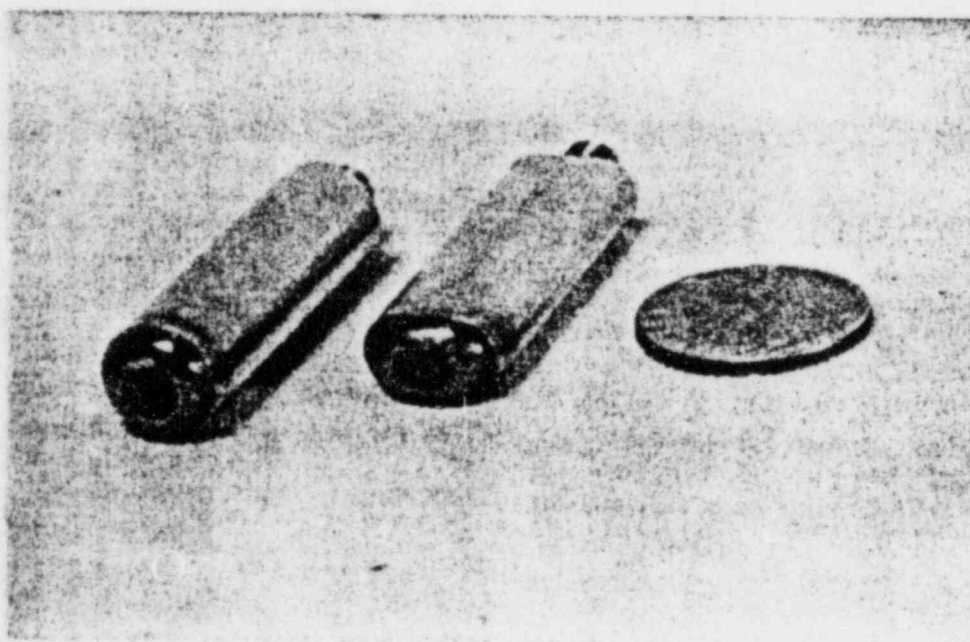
Welded Outer Capsule Before and After 20,000-lb Crush Test
